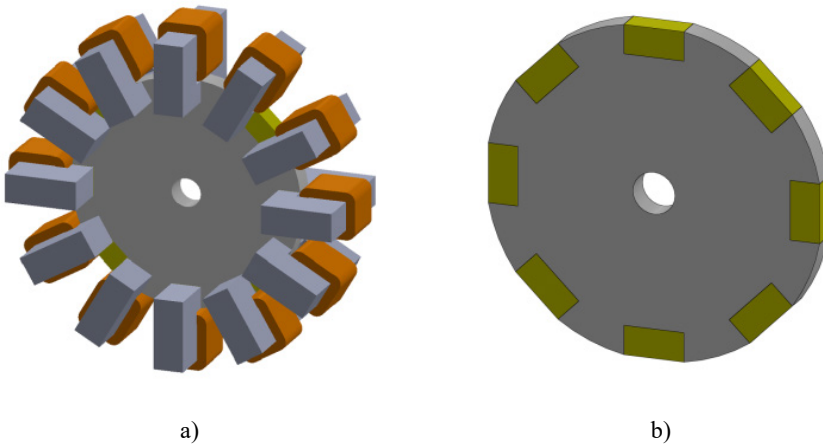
a) Rotor and stator arrangement by using axial-flux configuration and b) rotor detail [13]
